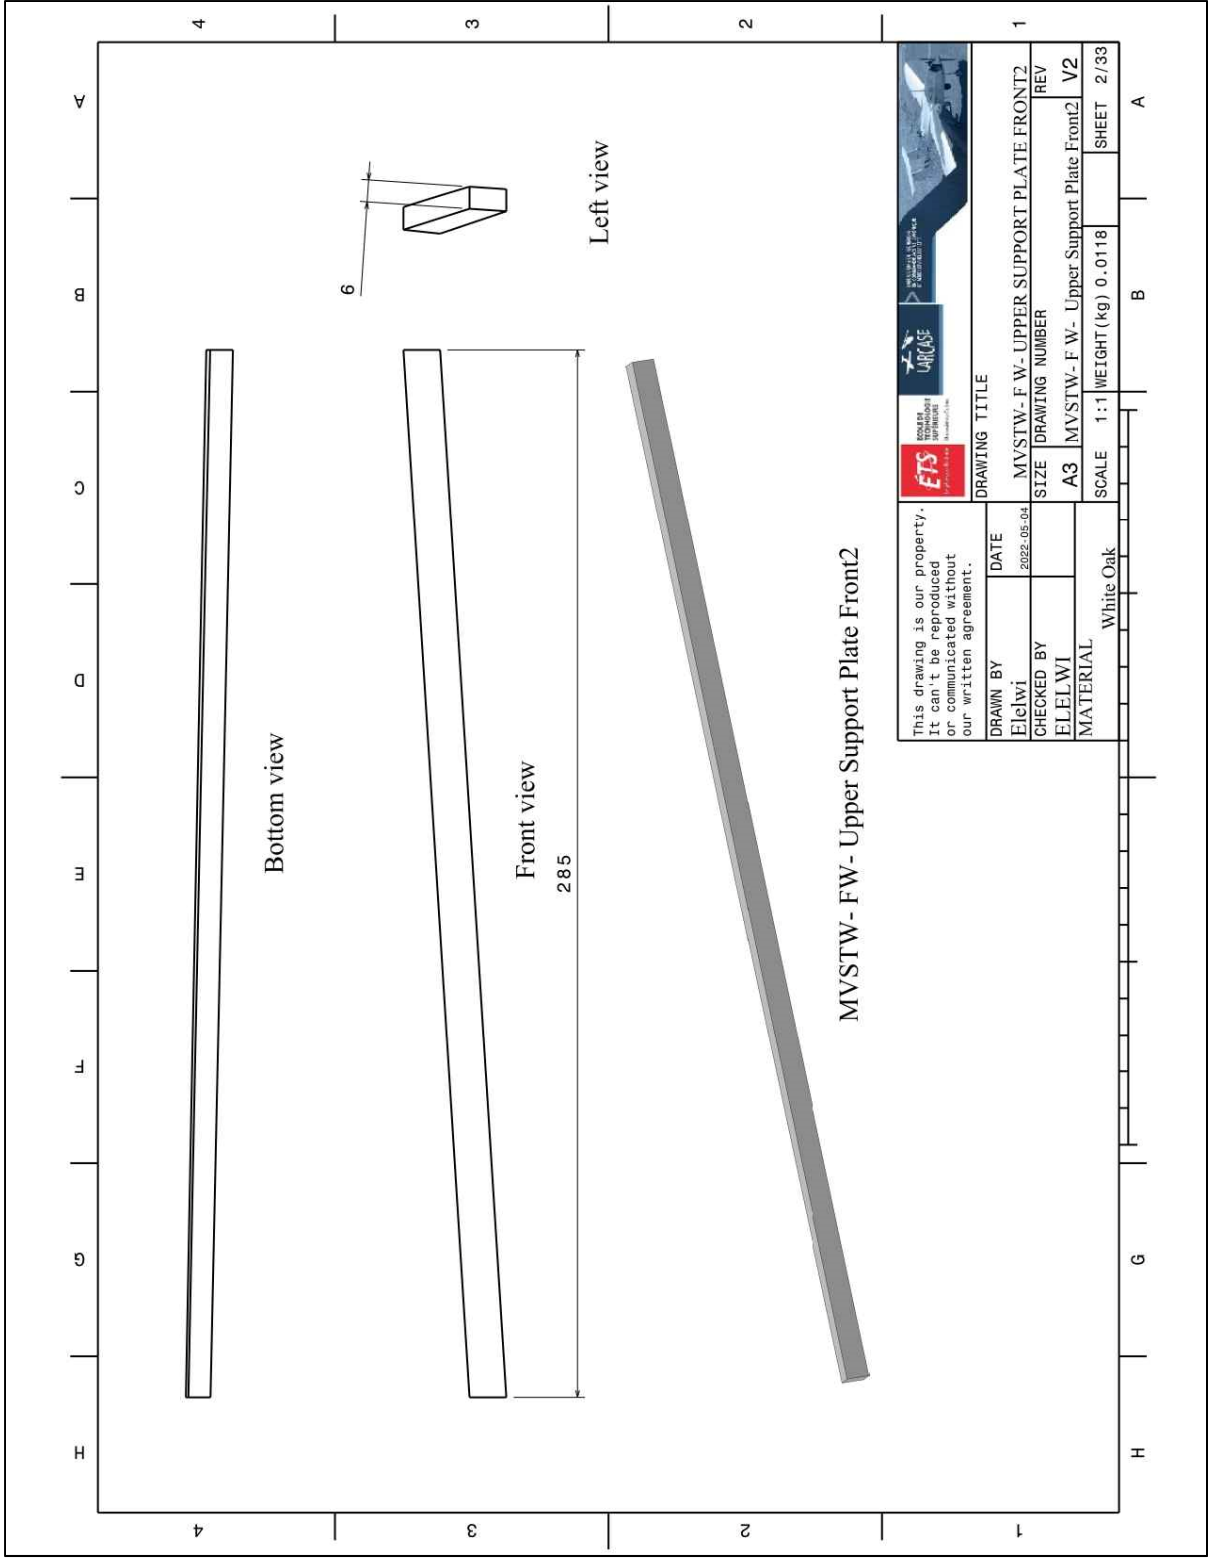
MVSTW Fixed Wing Upper Support plate Front2 Using White Oak
